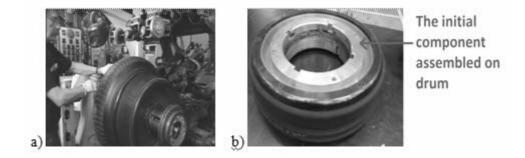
Tyres manufacturing process: a) wrapping the rubber-covered fabric plies; b) the metallic part mounted on drum, www.michelin.com.
